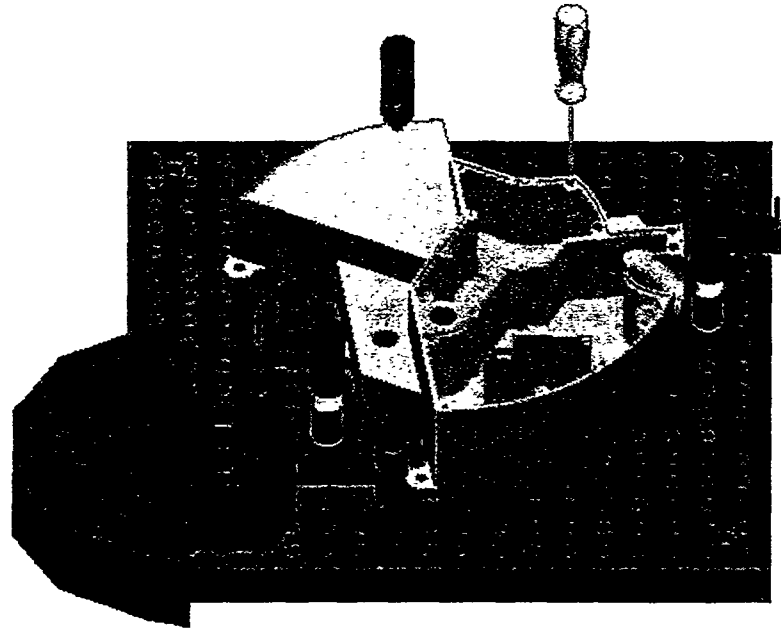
Illustration of a screwdriver tool use during the assembly operation.
